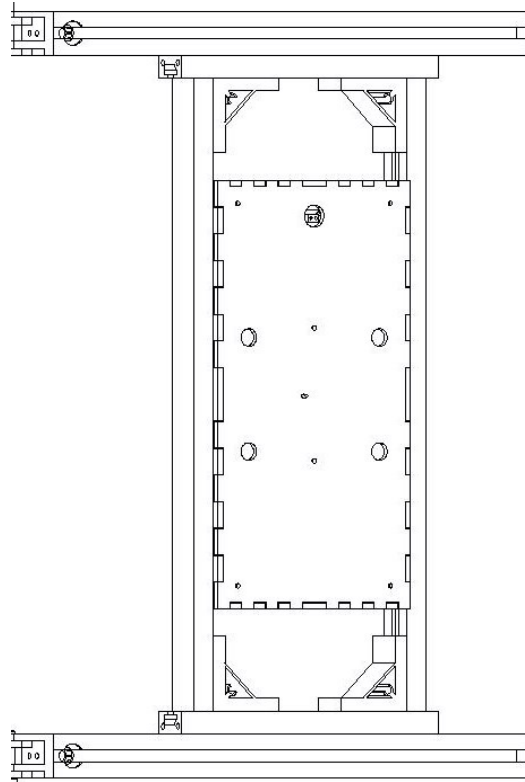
3D PRINTED BATTERY HOUSING - CAD IMAGE
